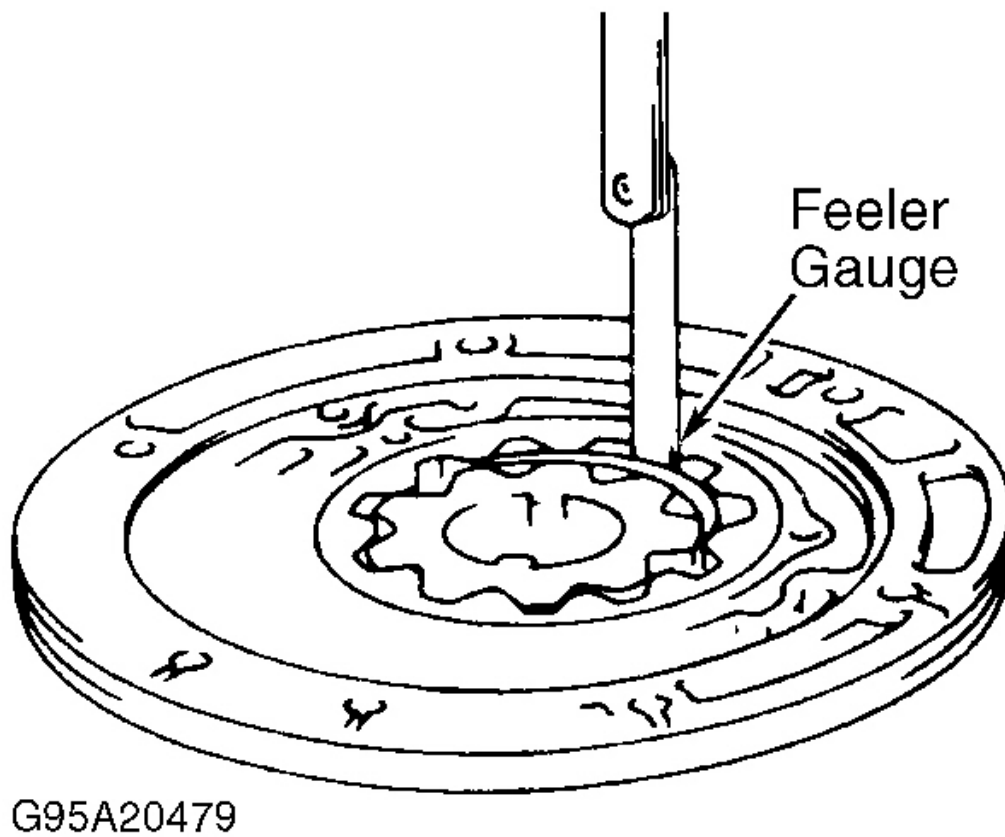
Measuring Oil Pump Gear Tip Clearance
